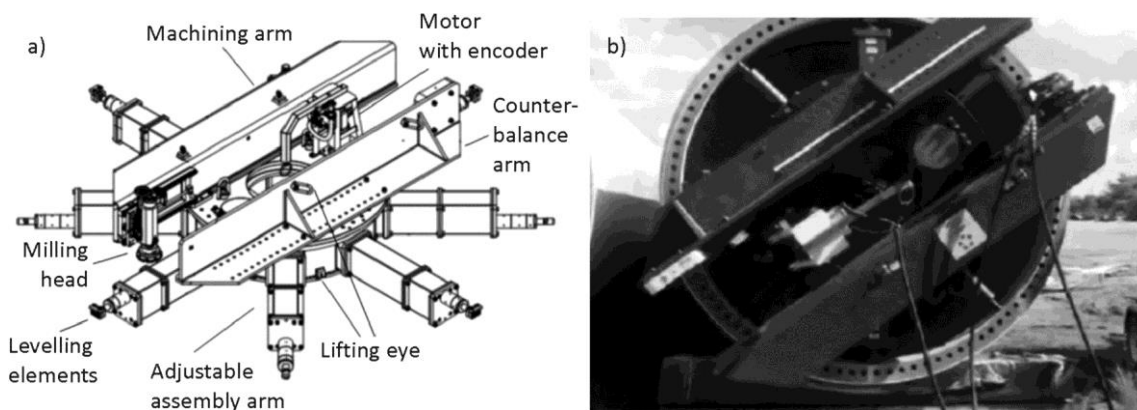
Portable flange facing machine: a) construction on the example of PM4200; b) milling flange face, an example of the construction of new installation
